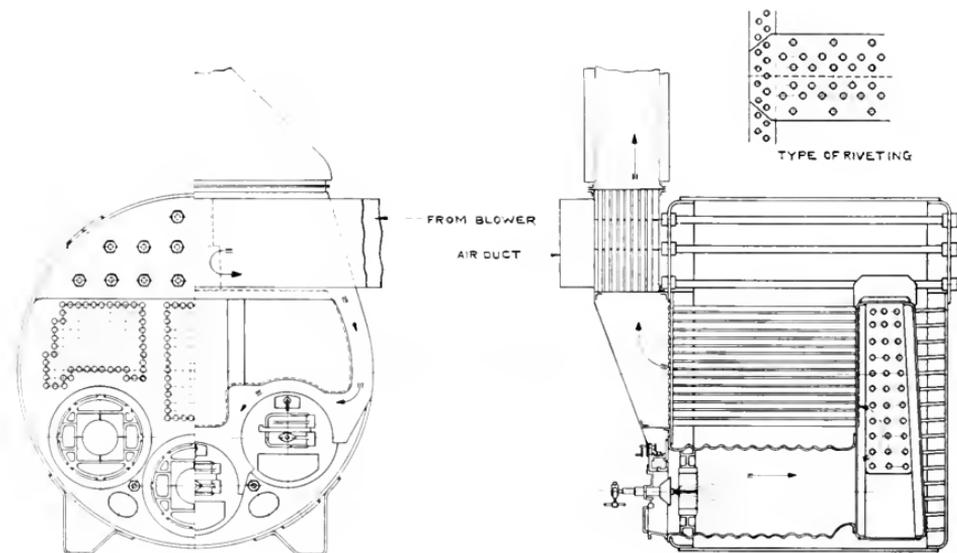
Return-tube Marine Boiler, Showing Details of Construction Together with Oil Burners and Arrangement for Forced Draft with Pre-heated Air
